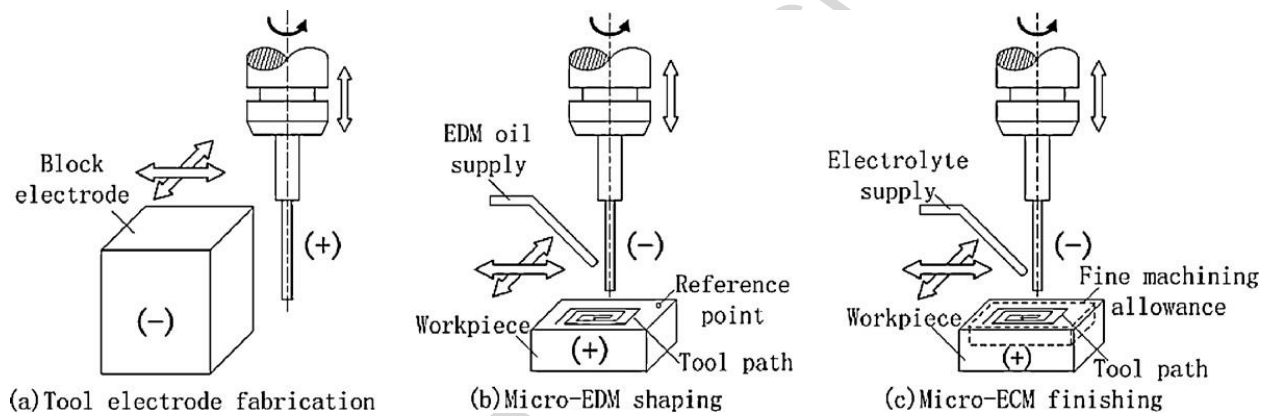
Concept of block-EDM/EDM/ECM sequential machining process [20]
